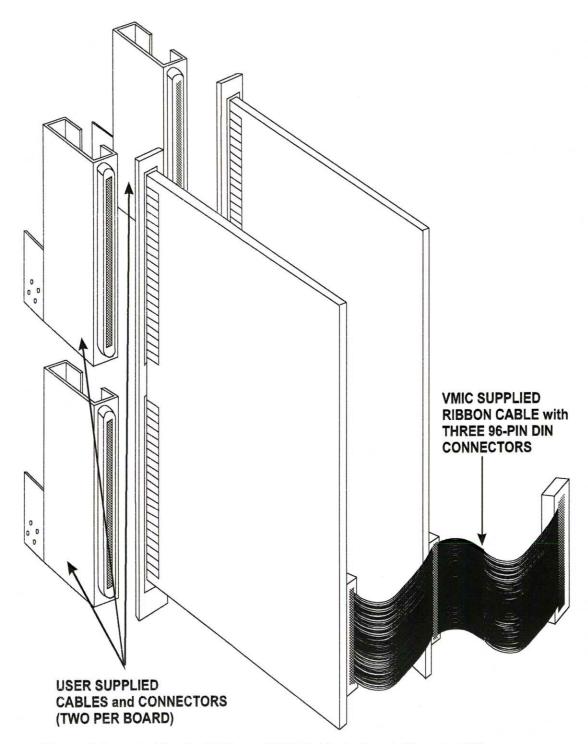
Cabling the 32-Channel D.I./D.O. Adapter Boards (Type A and B)
